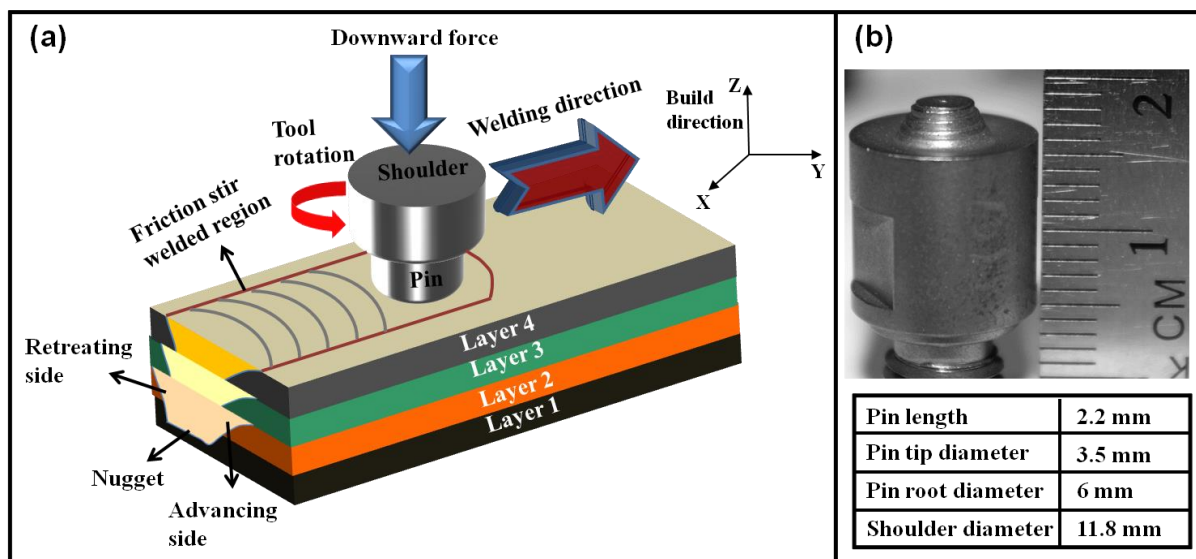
(a) Schematic illustration of the friction stir additive manufacturing (FSAM) process. Note that the build direction is perpendicular to the welding direction. (b) Photograph and dimensions of the tool used in the current study.
